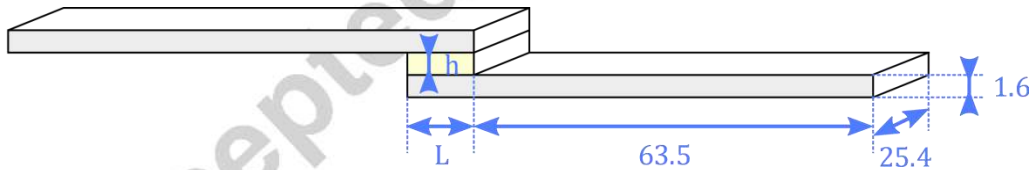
Single lap joint geometry. Dimensions are given in millimeters.
